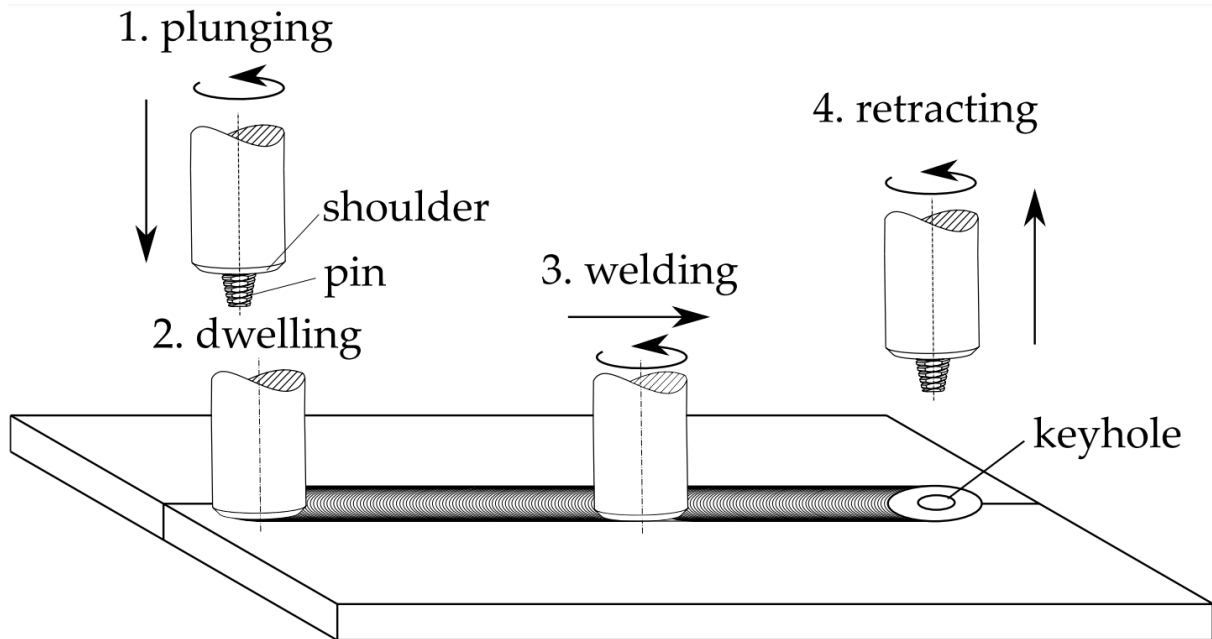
FSW steps: 1) tool plunging, 2) Dwelling, 3) Welding, 4) tool withdrawal [4]
